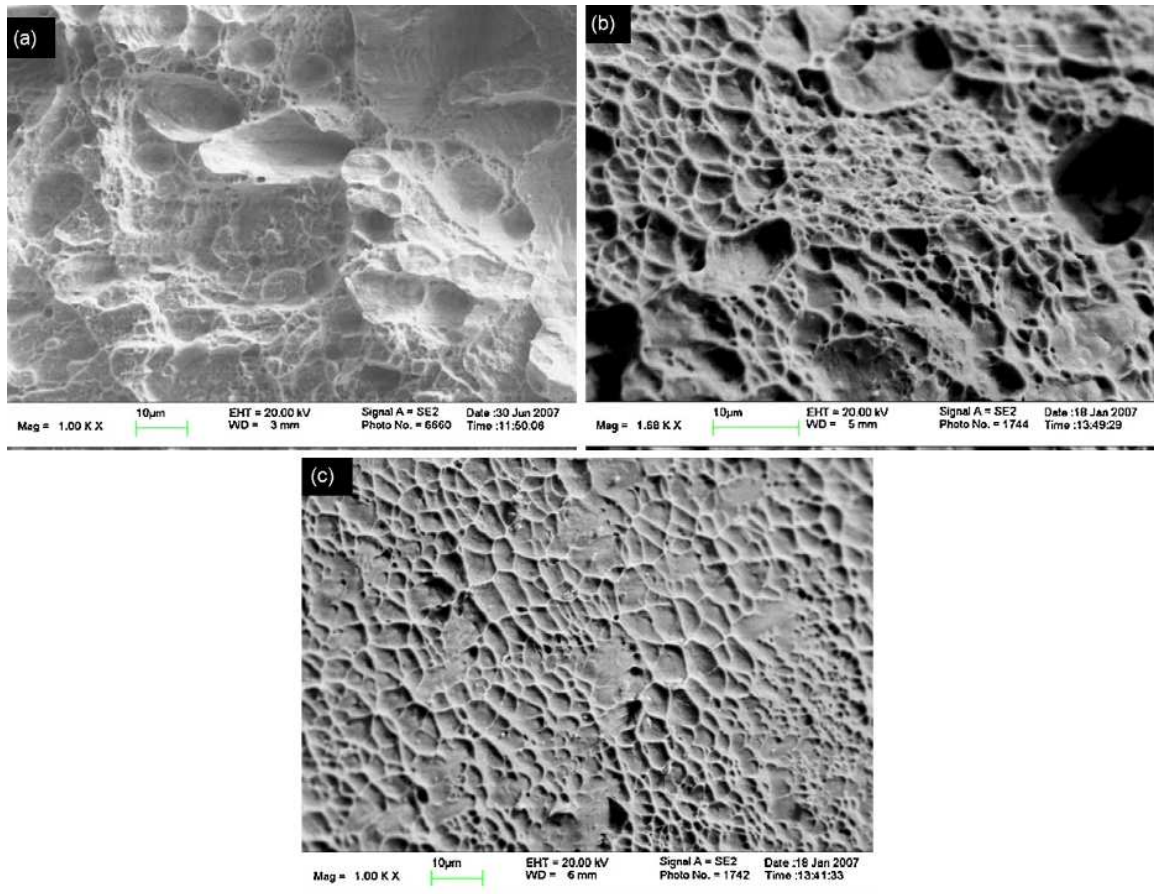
Fracture surfaces of the annealed sample with (a) from the center and (b) from the edge of the specimen.
